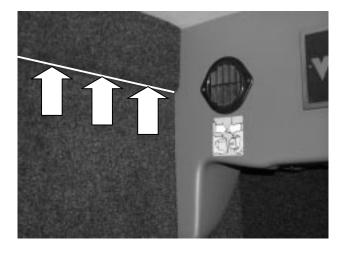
Trimmed plinth covering the gap between restroom ceiling and coach roof
